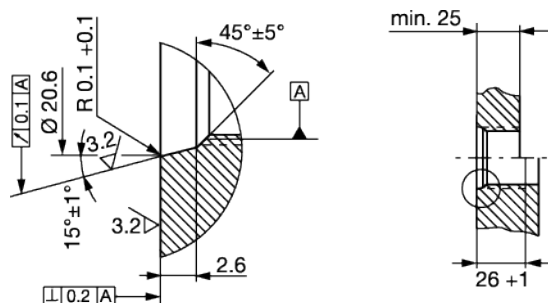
Mounting hole 3/4"-16UNF according to SAE J475 O-Ring 15.3×2.4
